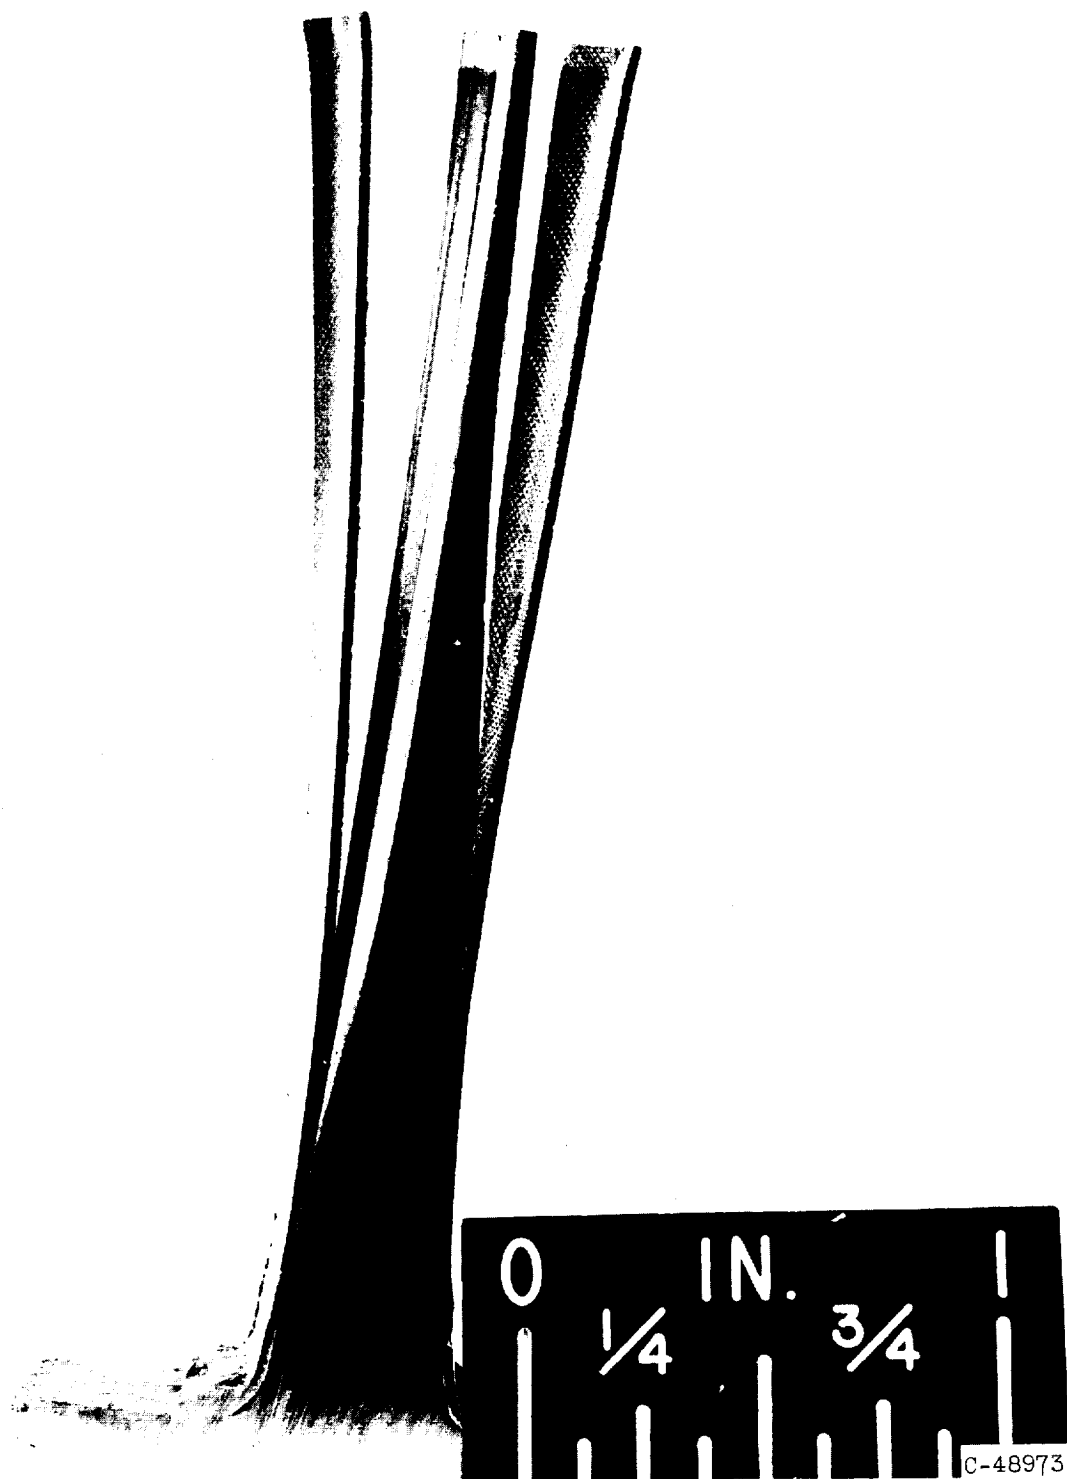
Enlarged view of the center section of blade 4 indicating lack of bond between shell and strut
